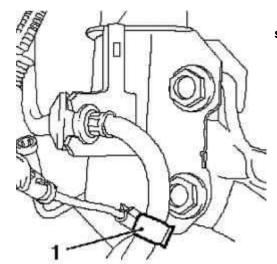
Fixing wiring harness sensor: 1 - time
